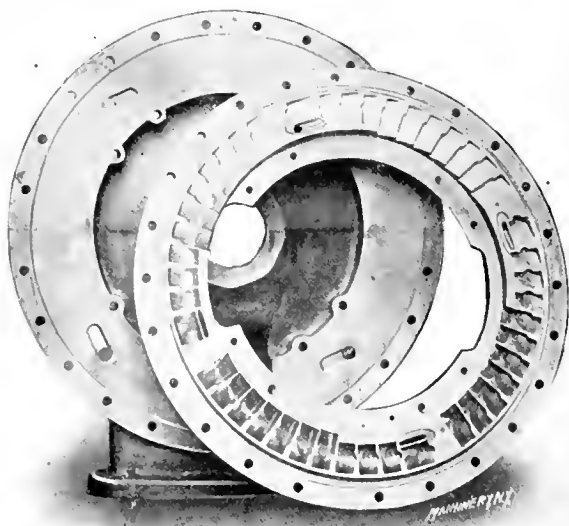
Guide Plate for Returning the Steam to the Runner.
